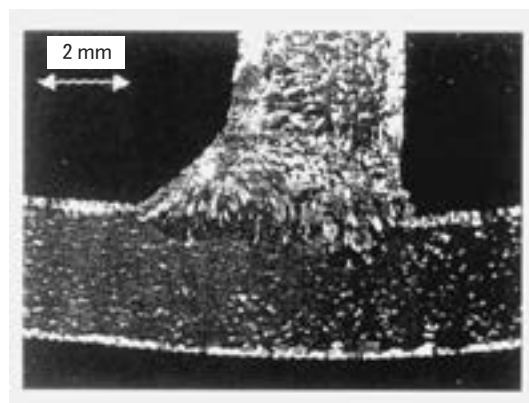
Skin-stringer joint by CO₂ Laser welding.
